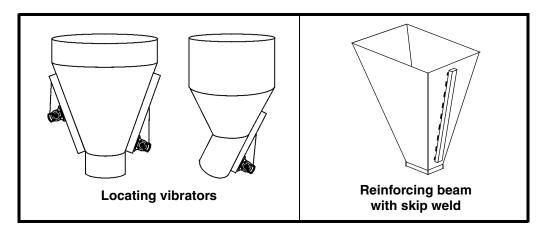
Locating Vibrators and Reinforcing Beams on Hoppers
